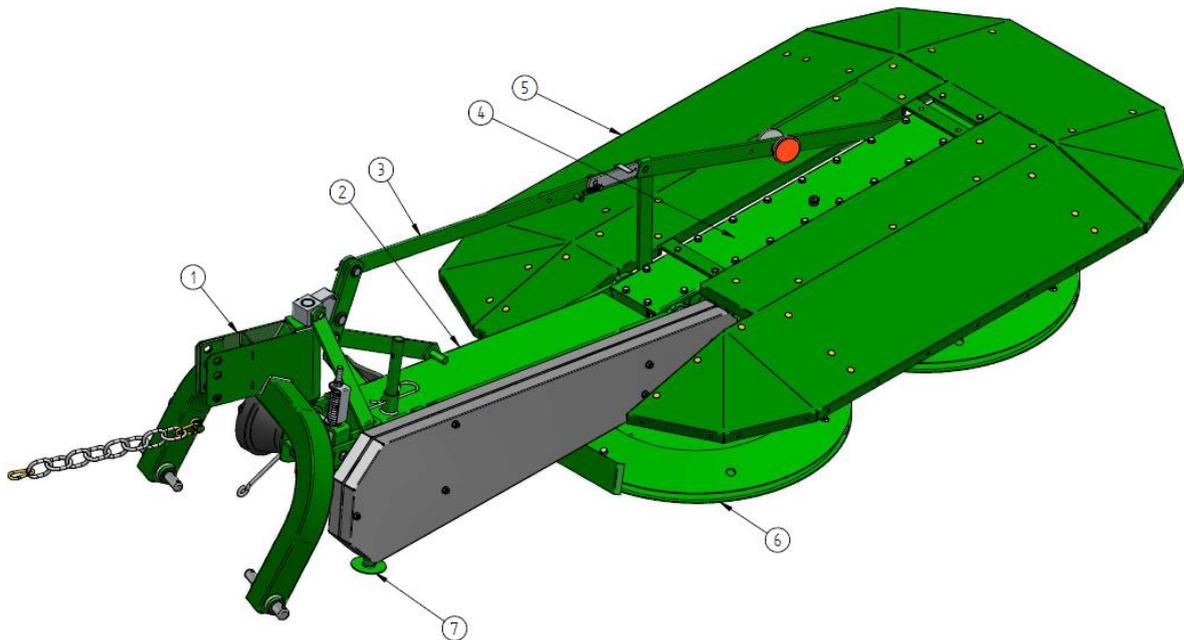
Overall machine construction: 1 - suspension frame; 2 – main chassis; 3 – connectors unit/cylinder (depending on the model); 4 – cutting unit; 5 – cover assembly covers; 6 – working section of cutting unit; 7 – support foot.
